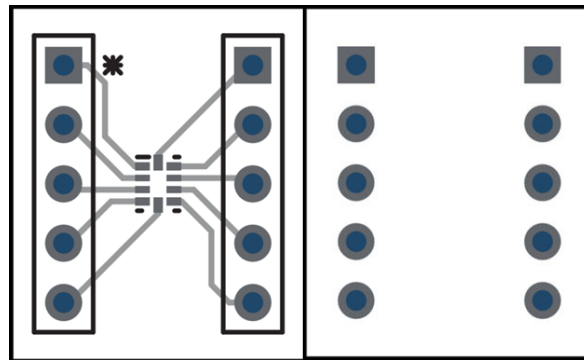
DCN and DDF packages top layer (left) and bottom layer (right) PCB layout
